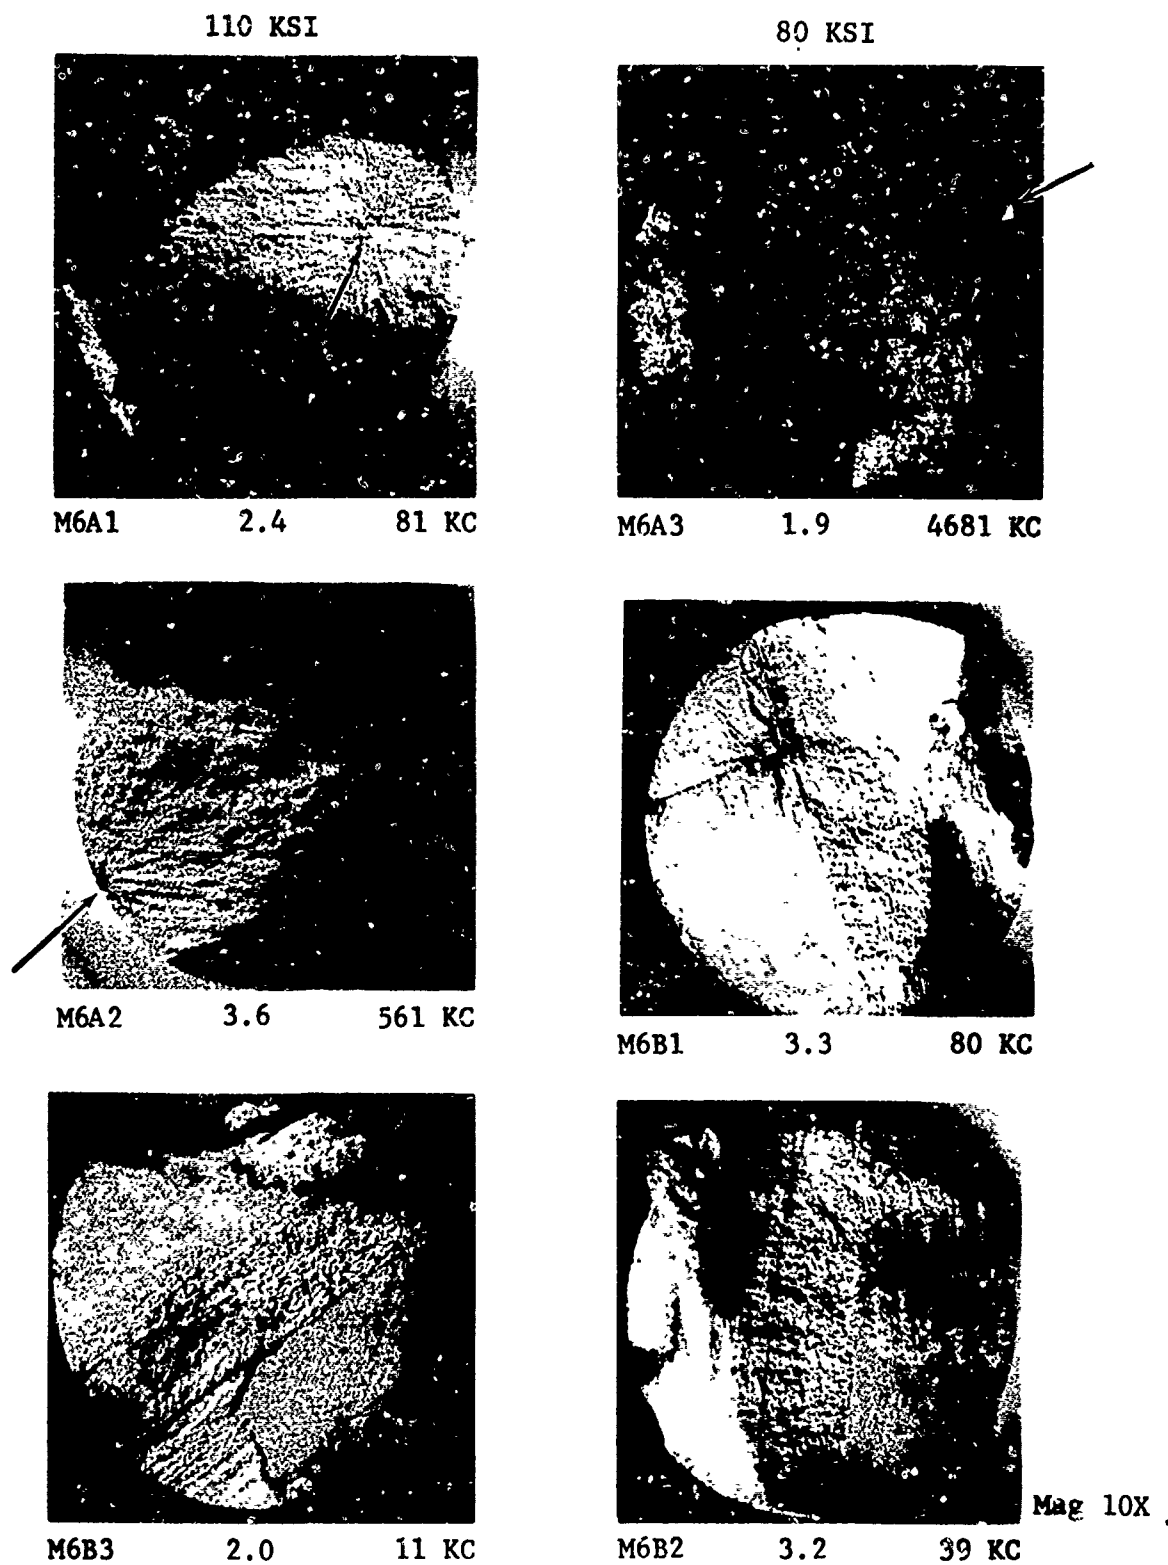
Fracture Surfaces of Failed Fatigue Specimens Series X5-
